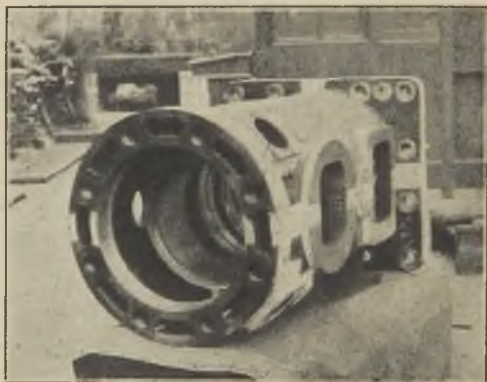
PARTLY MACHINED DIESEL ENGINE CYLINDER.
